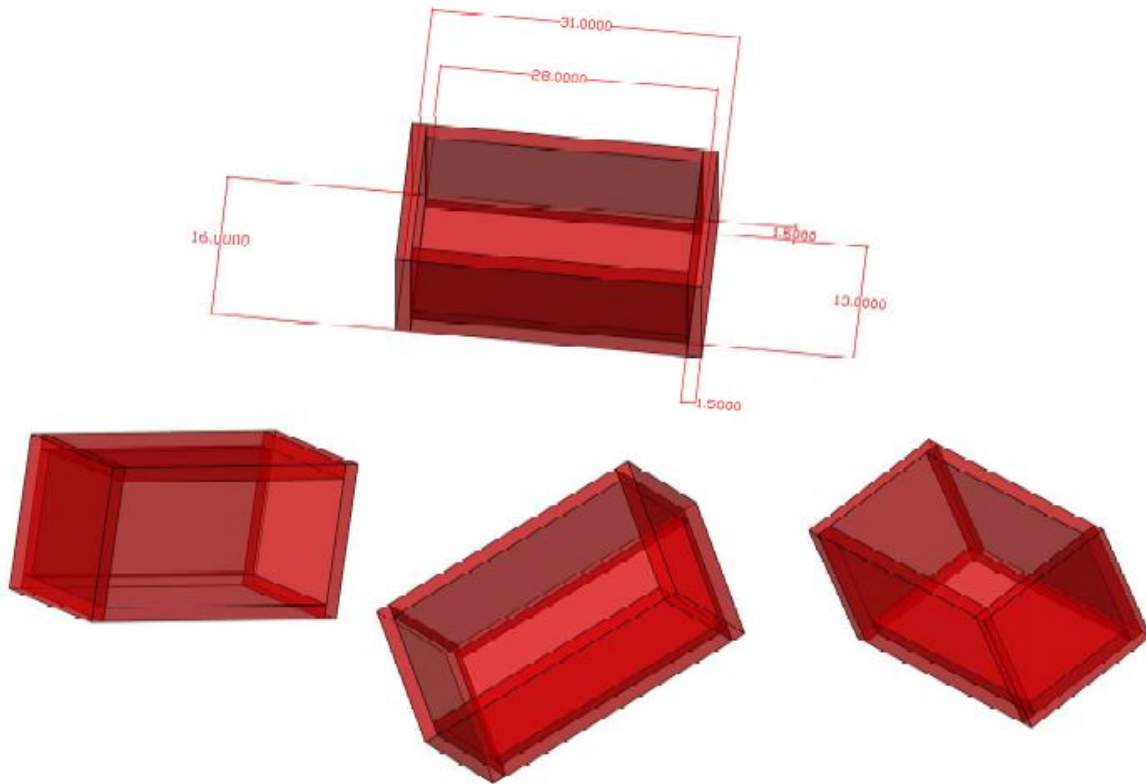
Auto CAD drawing of the Chladni Visual Demonstration Unit case with dimensions. Drawn by Robert Toledo III.
